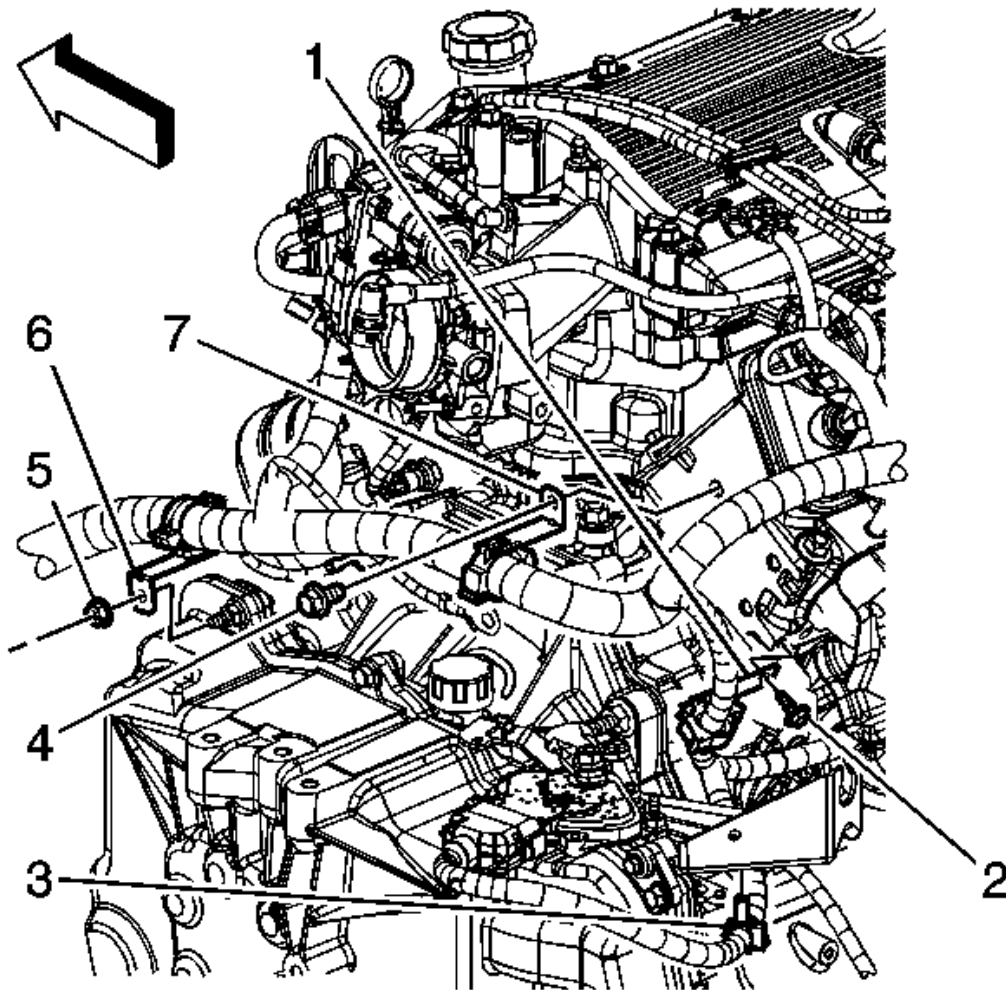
Identifying Engine Wiring Harness Clip & Nut (at Transaxle Stud)
